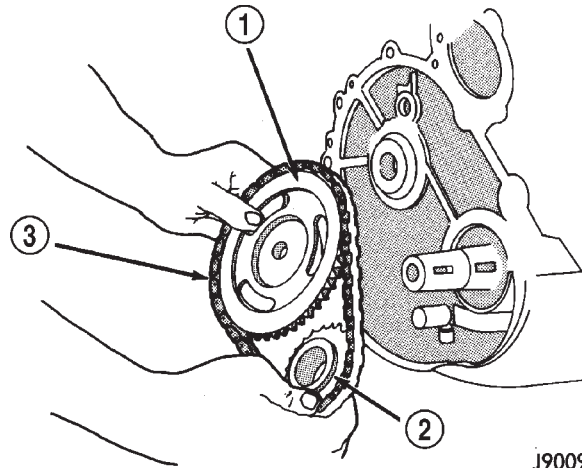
Camshaft and Crankshaft Sprockets and Chain
